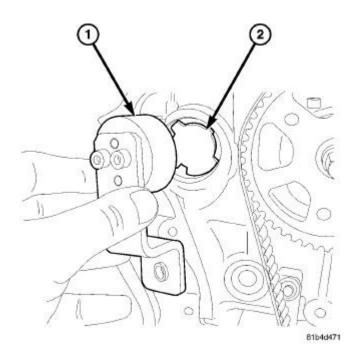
INSTALLING CAMSHAFT LOCK TOOL Courtesy of CHRYSLER LLC
